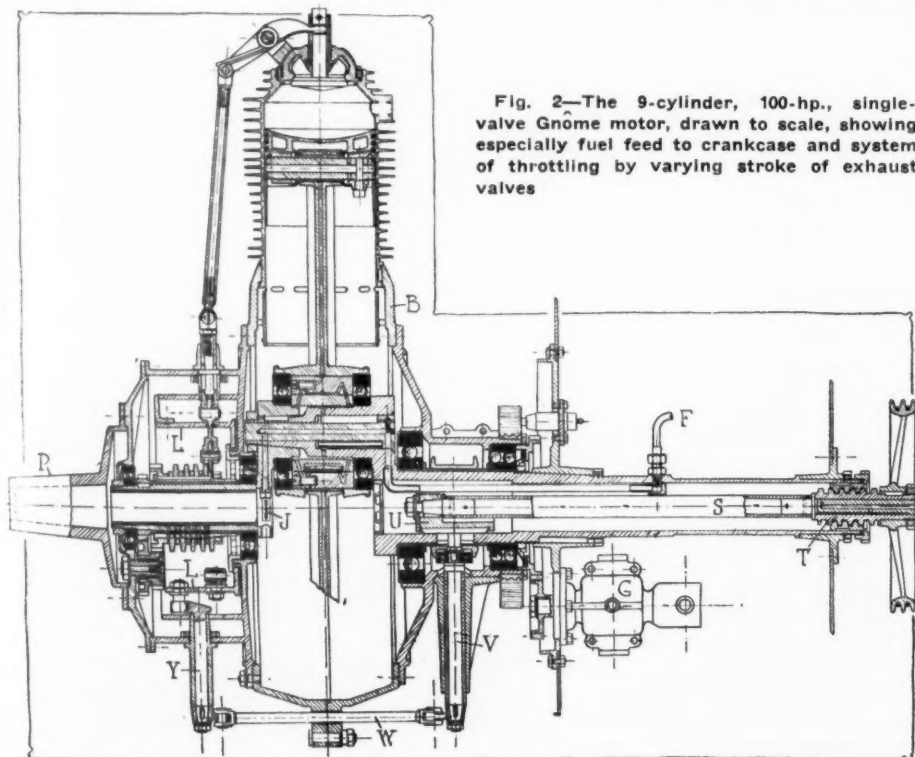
The 9-cylinder, 100-hp., single-valve Gnome motor, drawn to scale, showing especially fuel feed to crankcase and system of throttling by varying stroke of exhaust valves
